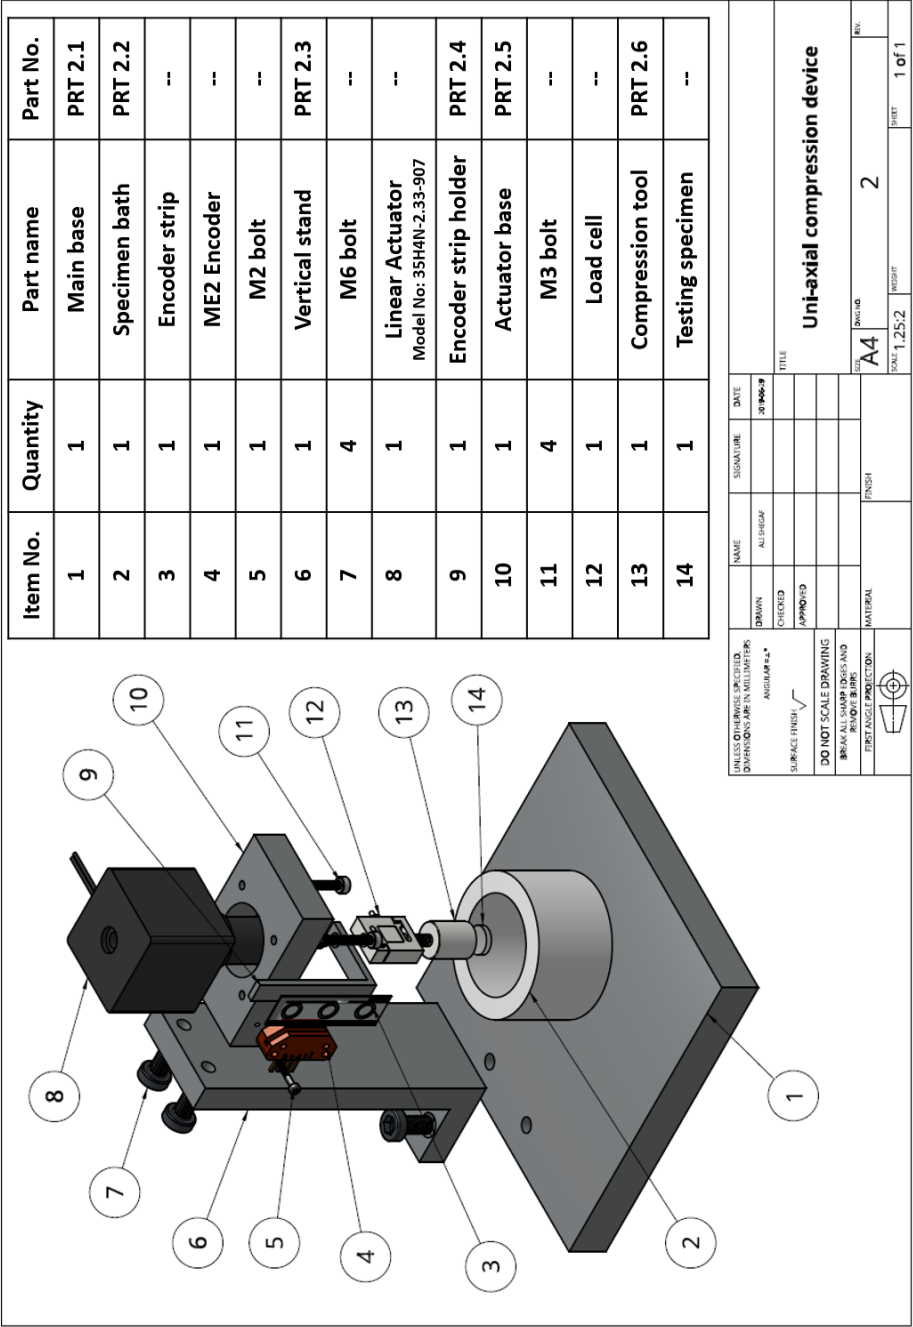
Uni-axial compression Apparatus: Exploded view.
